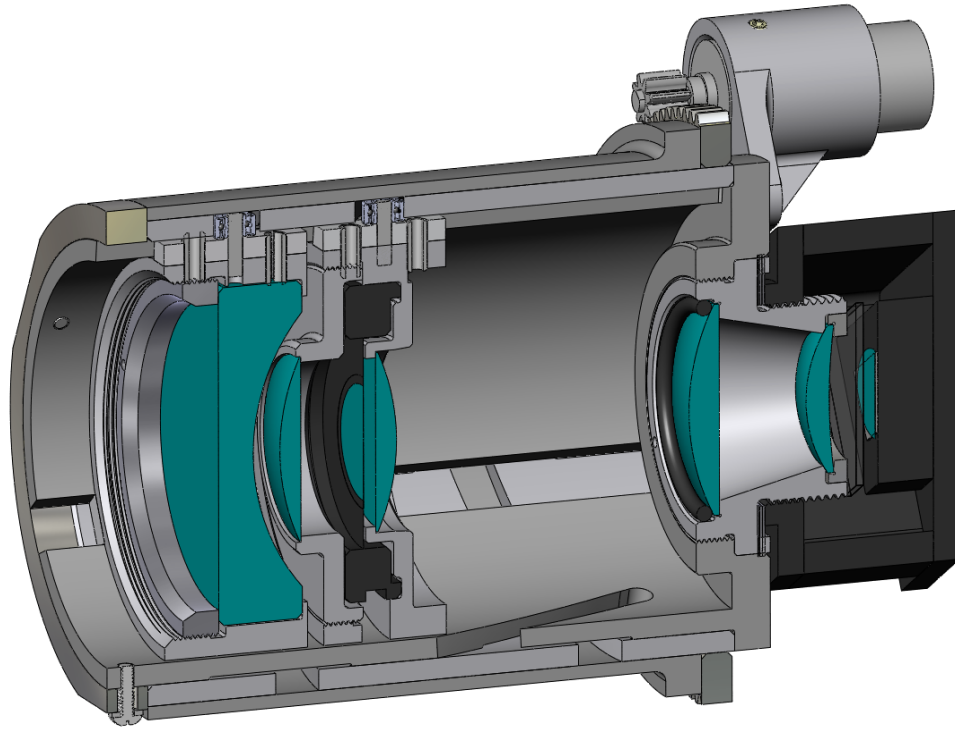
Cross section view of fully assembled prototype 3.4 in the zoomed in position, showing lens mount bearings and guides.
